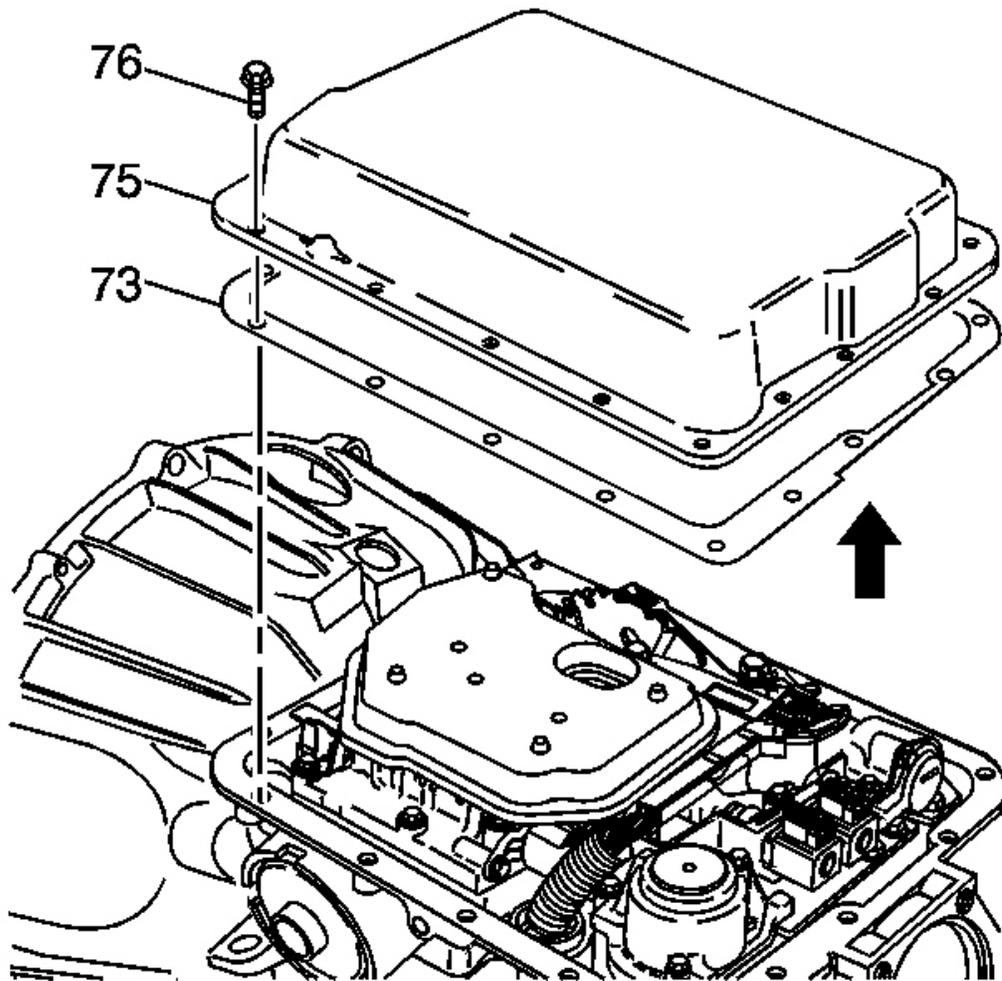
Transmission Oil Pan, Screws, & Gasket
